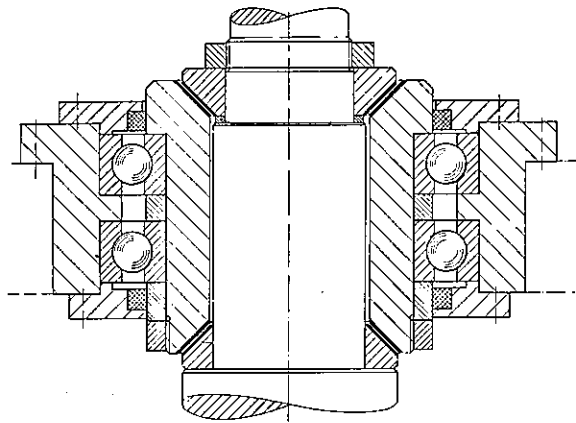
Retainer and centering bearing for vertically arranged rotors
